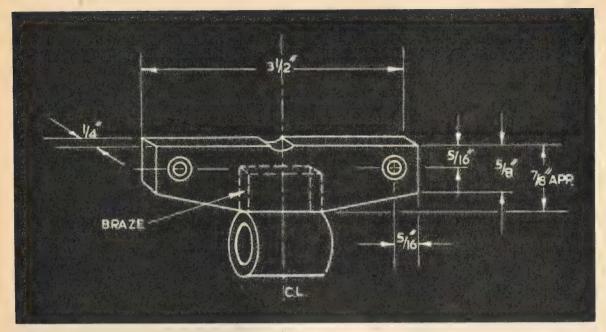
Chief dimensions for modified leadscrew nut fixing
